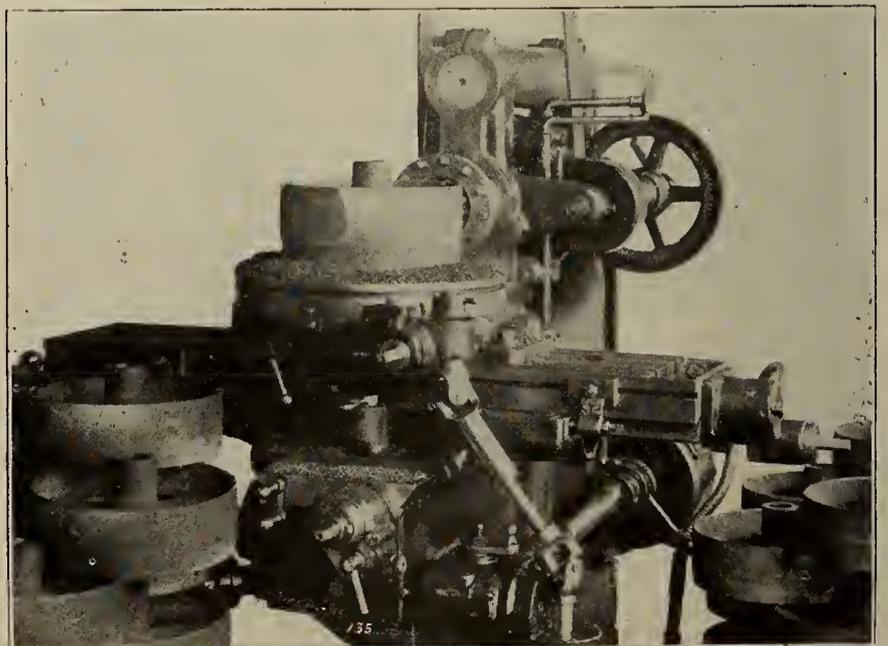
MILLING FACES OF 12-IN. PULLEYS.
